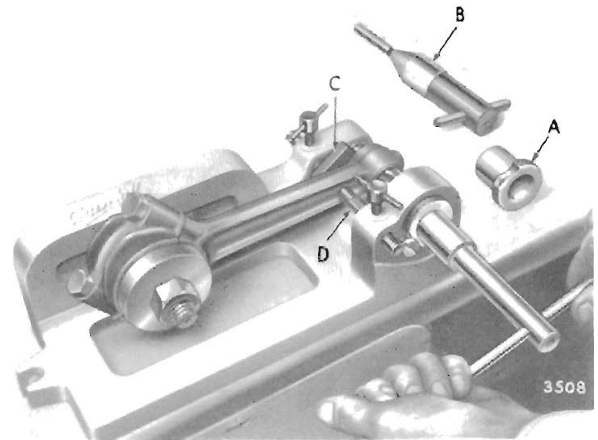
Reaming the gudgeon pin bush — using tool No. 6200B
